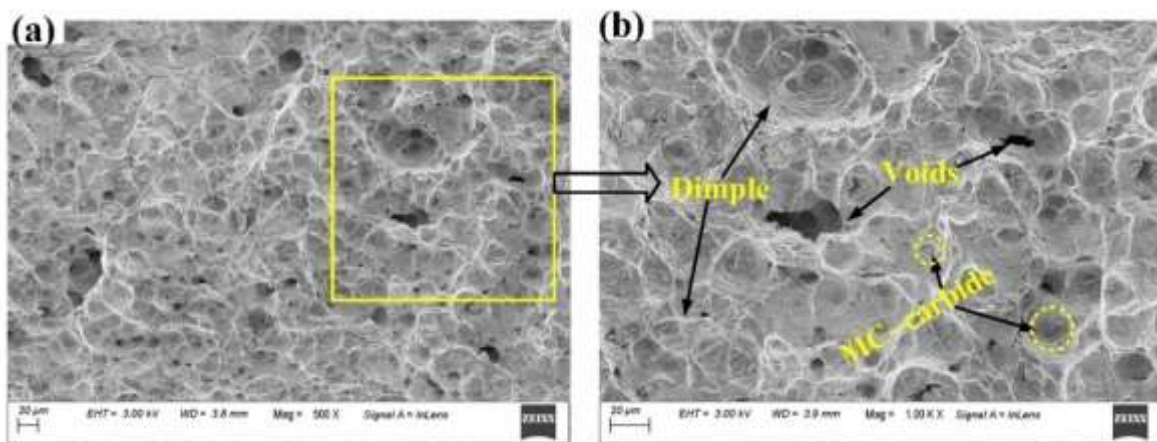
SEM fractography of (a) tensile fractured sample Weld 5 and its (b) magnified view.
